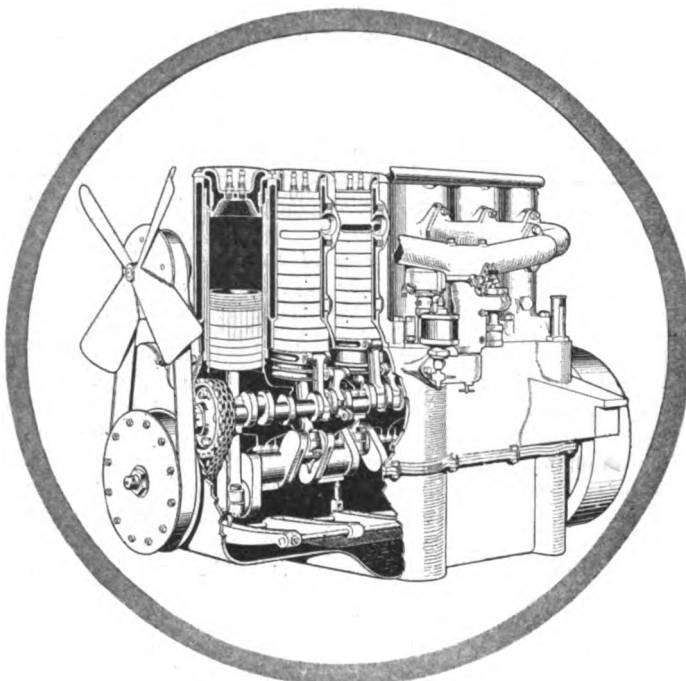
Part sectional view of the Stoddard-Dayton six-cylinder Knight motor
